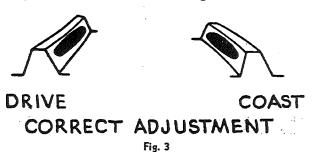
shows the correct bearing on both drive and coast or reverse side of the tooth. The tooth bearing, both lengthwise and profile of the gear, should appear as shown. The profile bearing should fade out about ½2 to ½6" from top of gear tooth. Profile of the tooth bearing on the pinion will extend to the top of the tooth.
